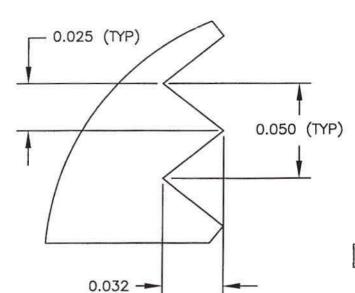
DETAIL B: RIDGE DETAIL PARTIAL SECTION SCALE 1:20
